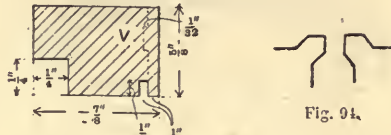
SECTION OF TOP RAIL. Fig. 94.—PLATE WIRES.
